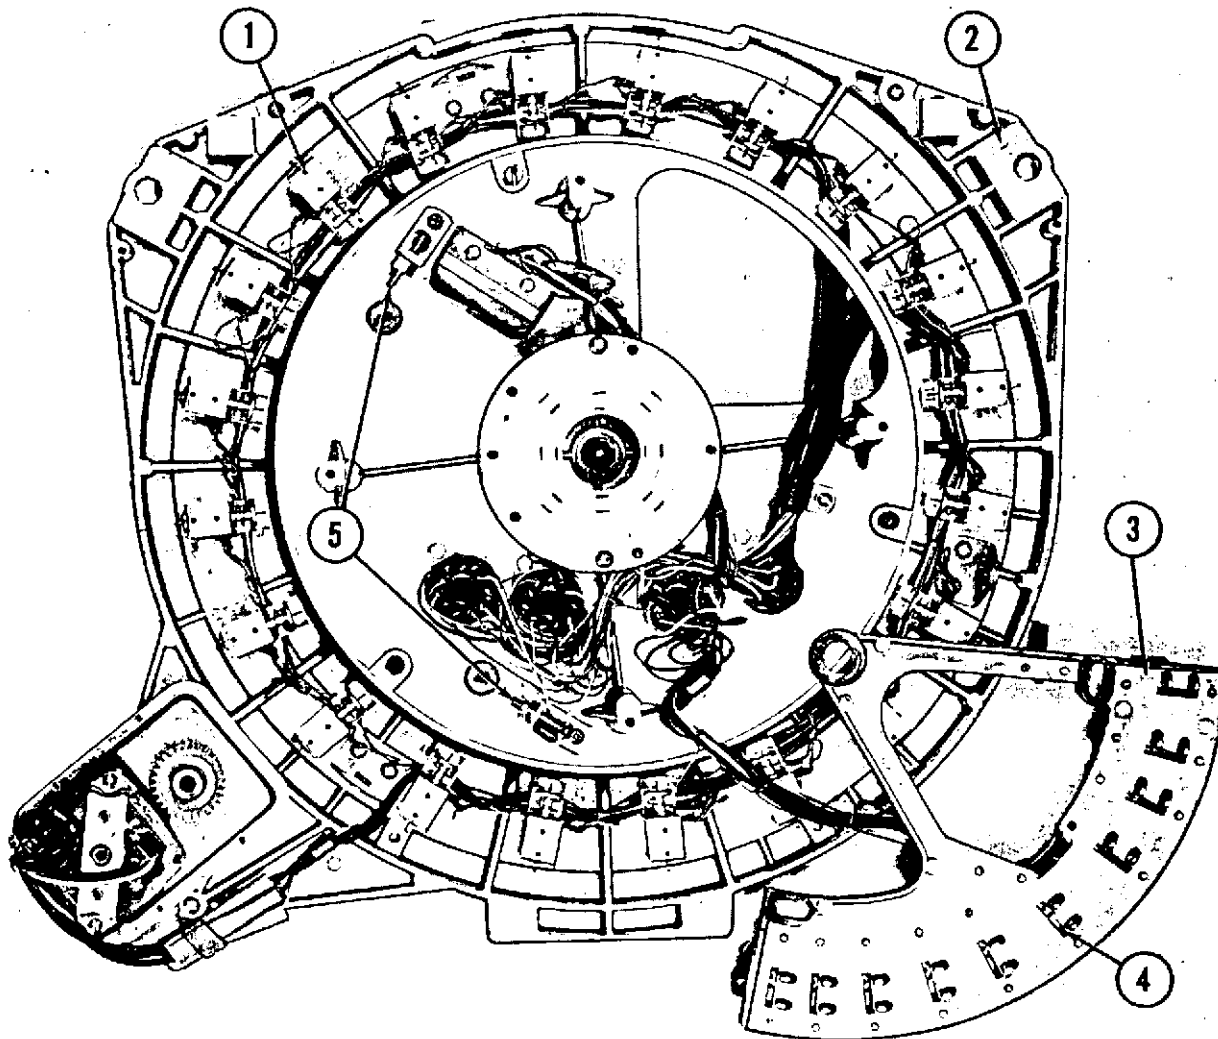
MOUNTING CASTING AND STOP SOLENOID ASSEMBLY 68127
